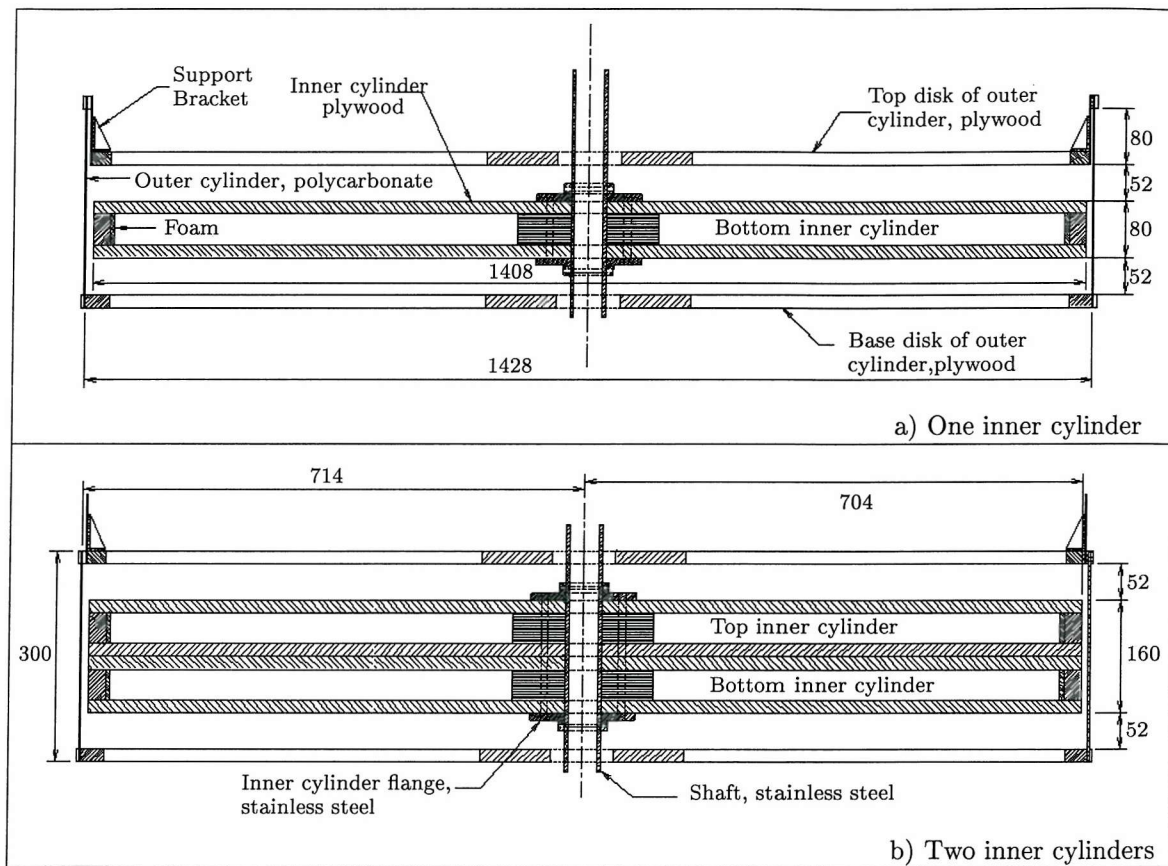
Both the possible sectional arrangements of the inner and outer cylinder
